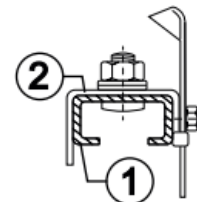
End Stop Assembly (Stainless) - Top End Stop (Gated) (P/N 506274)
